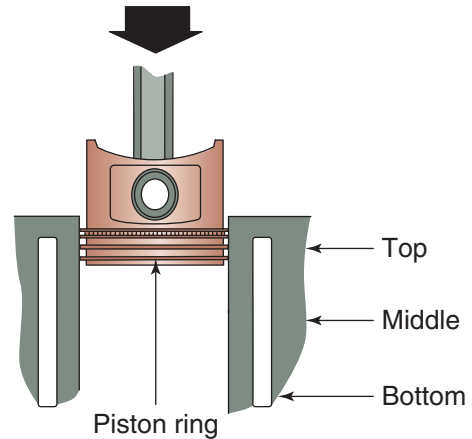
Use the piston to place the rings correctly into the cylinder prior to measuring the ring end gap.
